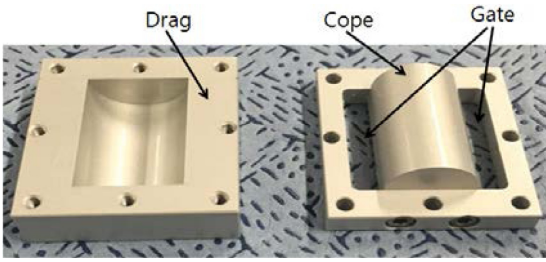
Photograph of aluminum mold for non-planar sensor body fabrication
